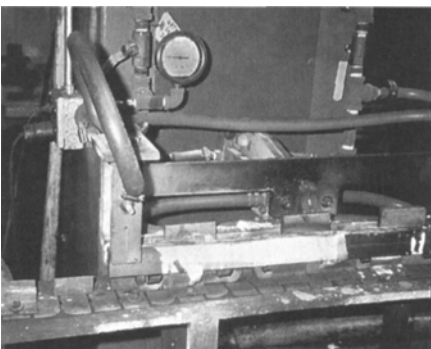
Unshielded workpieces moving in a coil of the INH.
